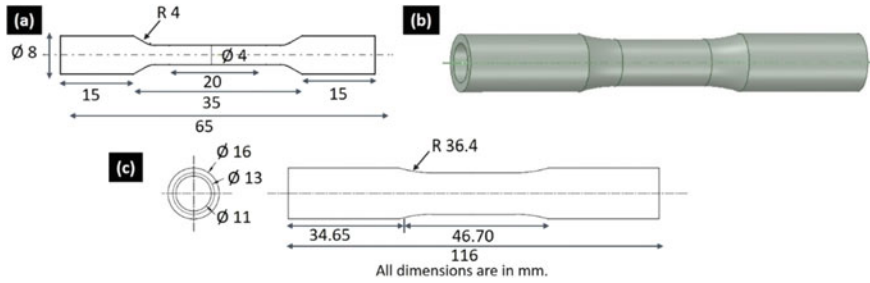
a Tensile test specimen geometry, b 3-D view of a multi-axial fatigue test specimen, and c Multi-axial fatigue specimen geometry
